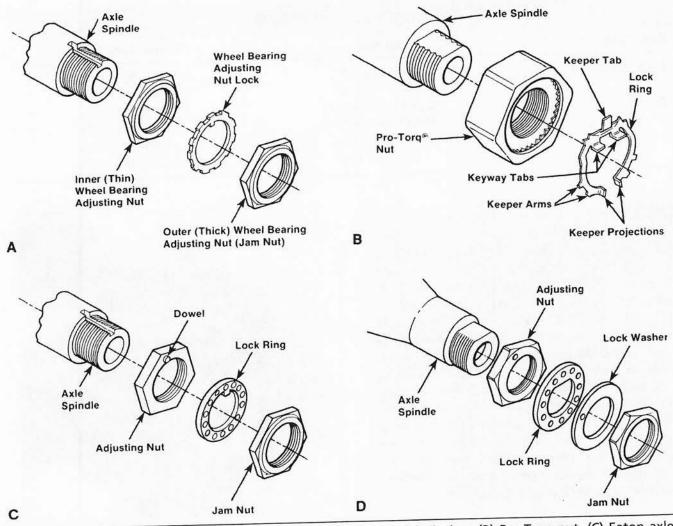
Bearing setting hardware: (A) jam nut and D-shaped lock ring, (B) Pro-Torq nut, (C) Eaton axle with adjusting nut and jam nut, and (D) Rockwell axle with adjusting nut and jam nut. (Courtesy of Daimler Trucks North America)
